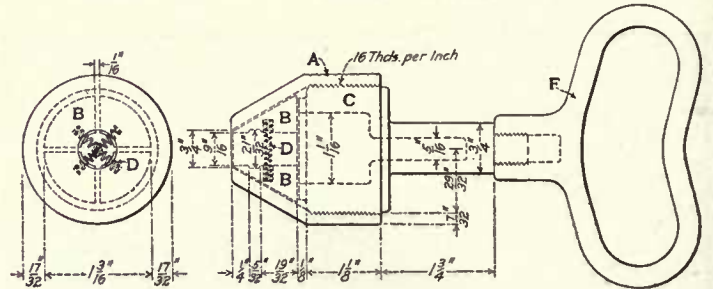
Triple Valve Piston Packing Ring Grinding Tool.
